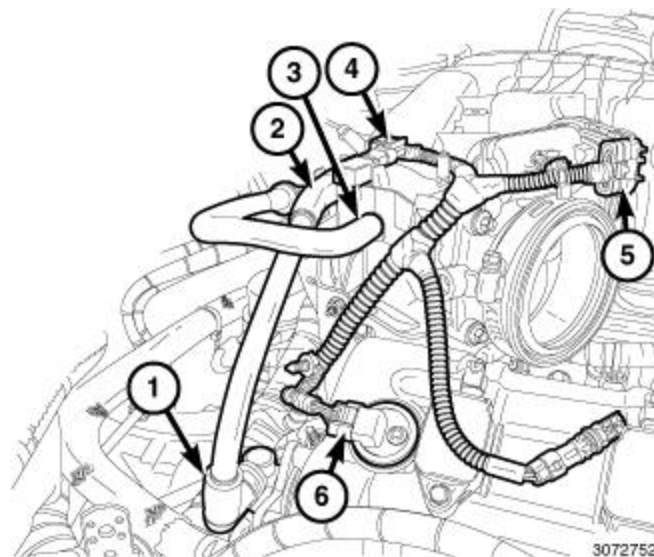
PCV Valve, Intake Manifold, Brake Booster Vacuum Hose, MAP Sensor, ETC & CMP Sensor Electrical Connectors
